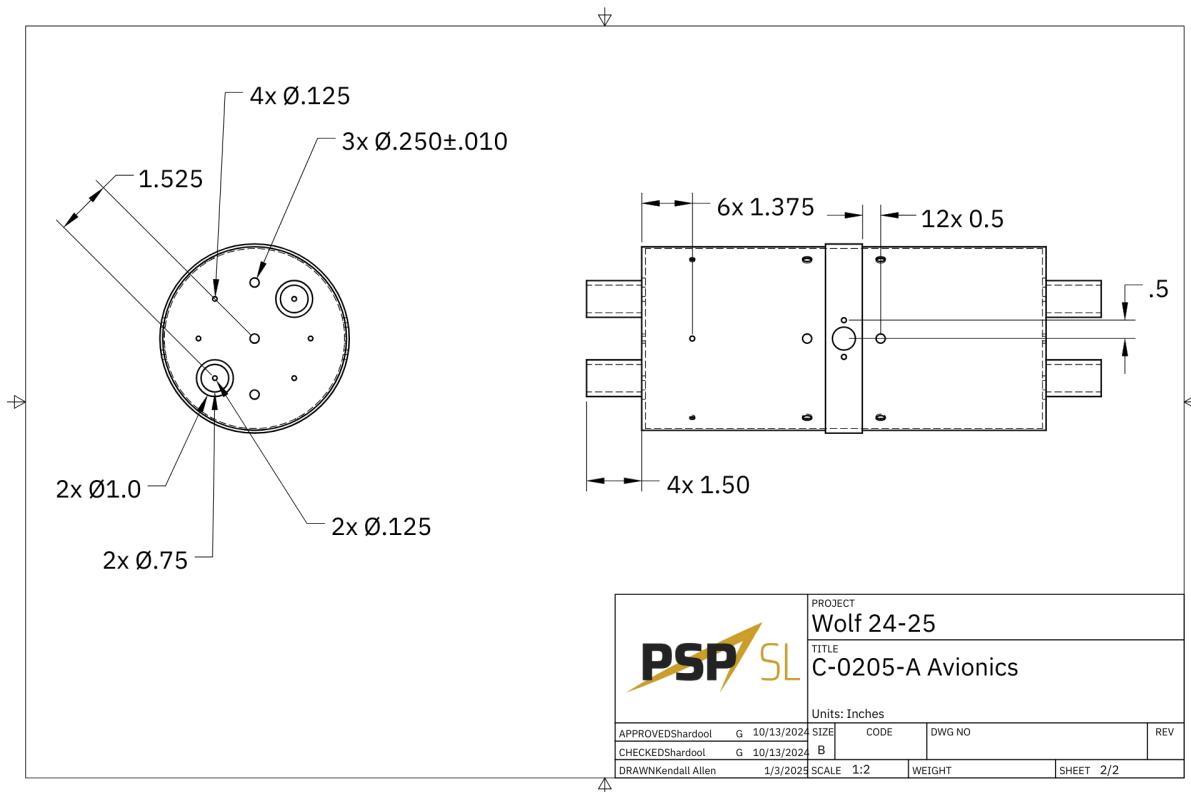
Avionics Coupler Technical Drawing (Sheet 2)
